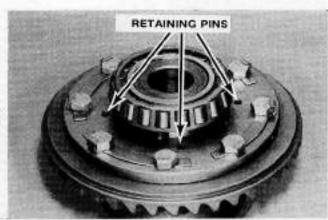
View showing retaining pin locations on bevel gear assembly.
